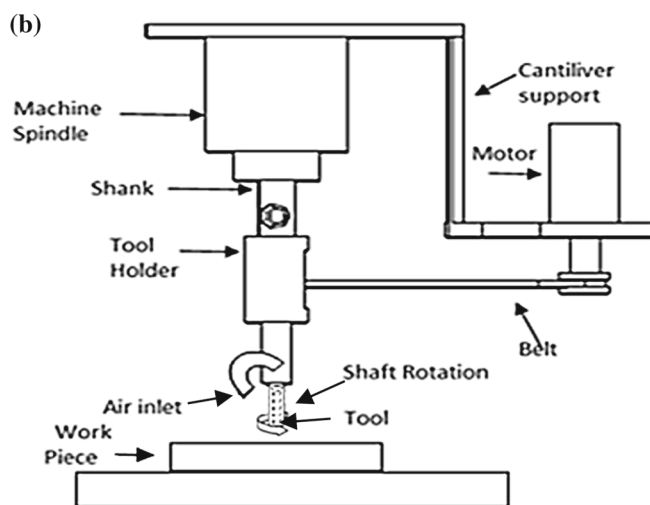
Schematic diagram of a tool electrode b experiment setup mounted on EDM machine [11]
